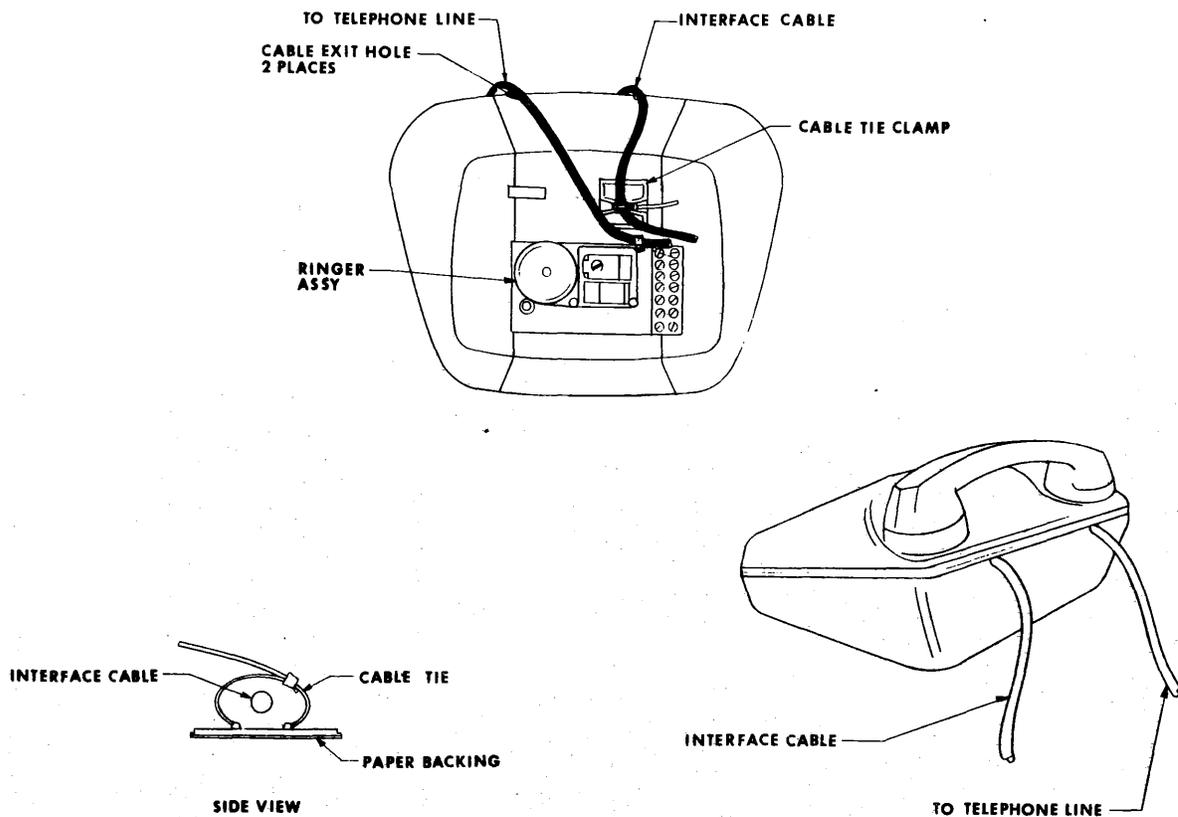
Connecting Interface Cable to AE890 Desk Set
